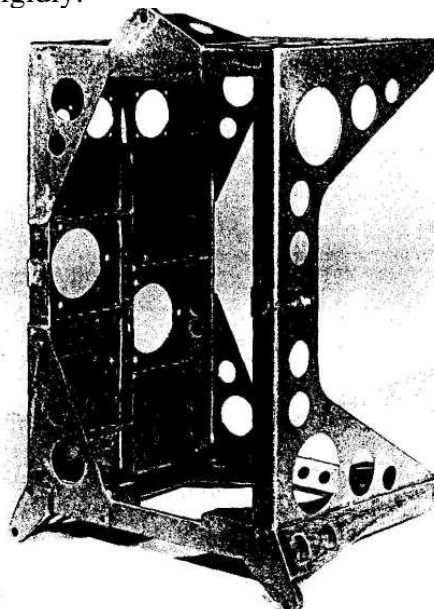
Dip-brazed electronic chassis with tack welds for positioning piece parts
